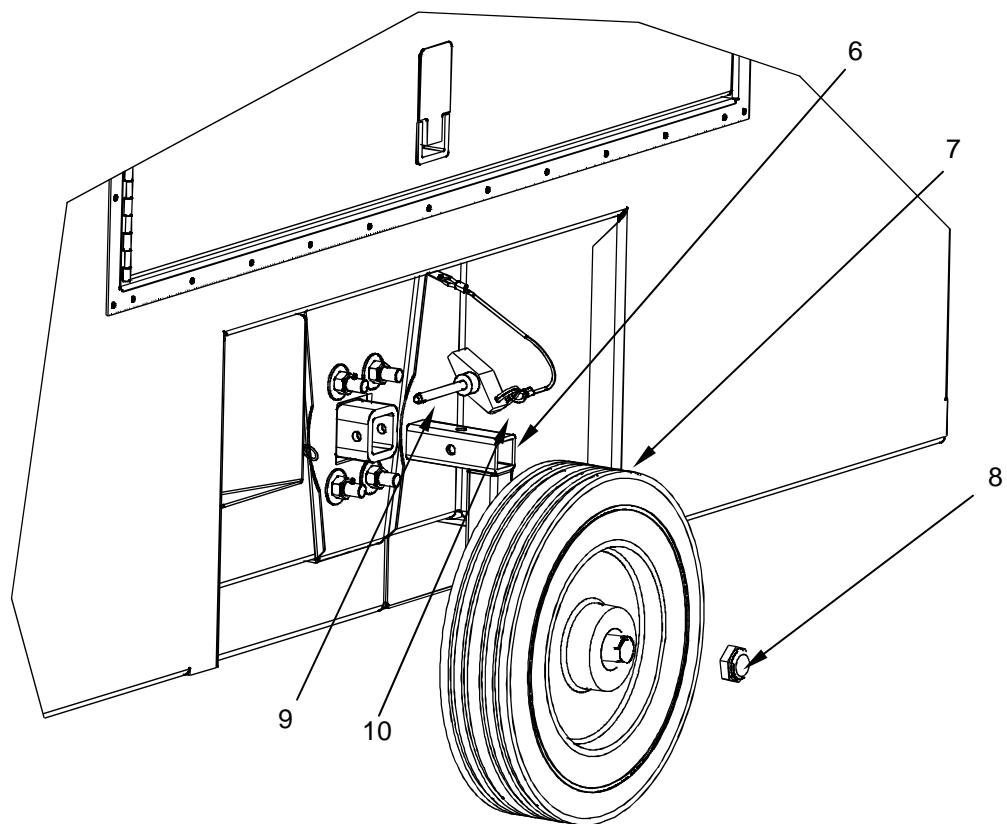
Installation, Wheel Retraction Assembly (Sheet 2 of 8).
